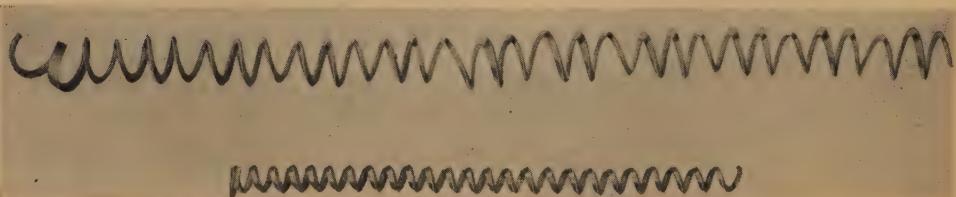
Chips removed from the surface of the billet shown in Figure 28. When it is considered that these chips are taken from the surface of a cast billet, it is evident that the casting itself closely approaches physical perfection.
